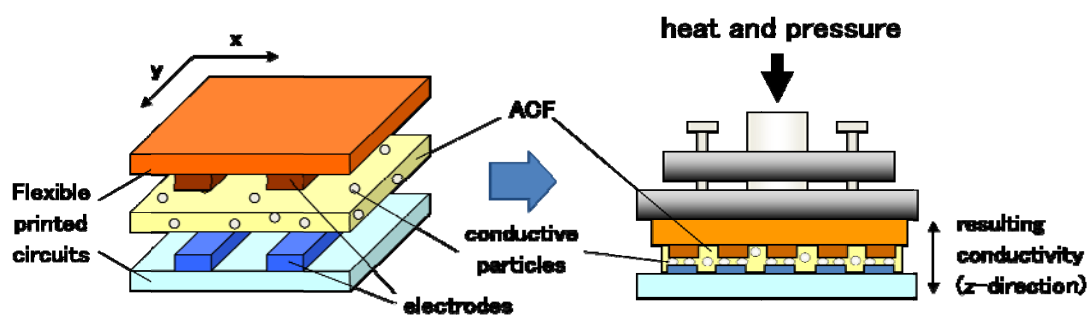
Flexible printed circuit assembly using heat-curable ACF.
